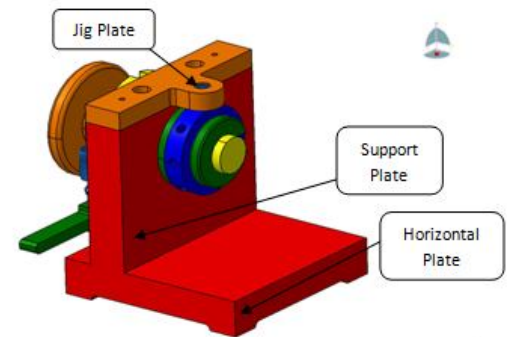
3d model of complete assembly of indexing jig in isometric back view
